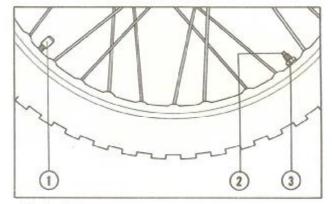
(1) Valve cap (2) Rim lock (3) Lock nut
